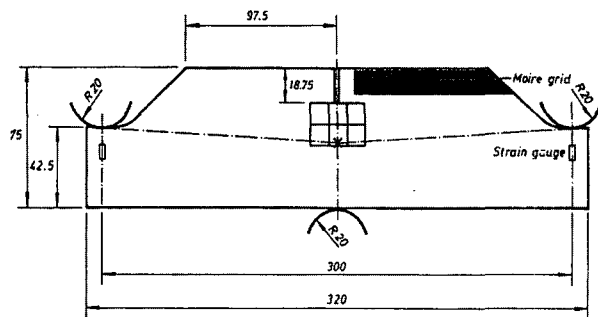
Dimensions of the new designed 3PB specimen [mm].
